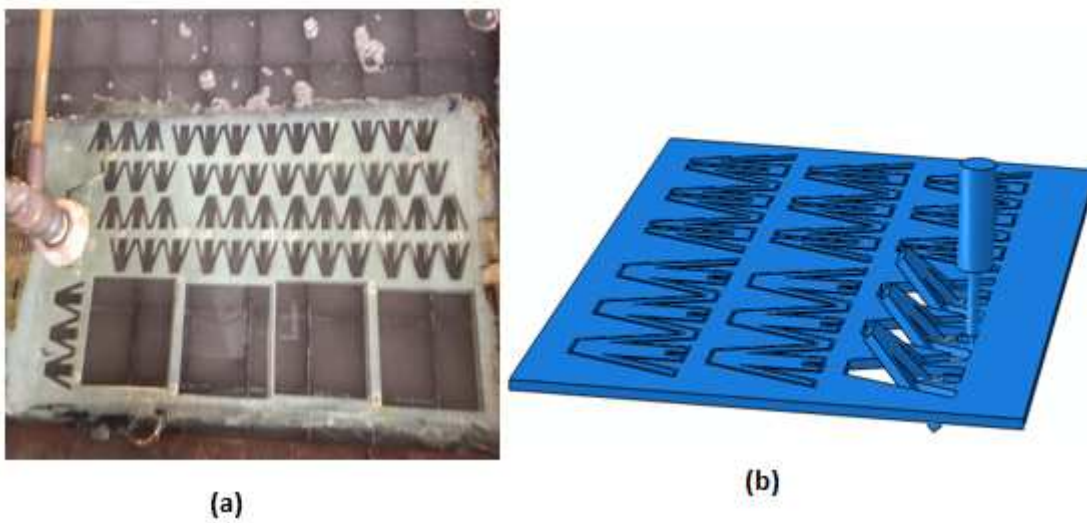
Cutting laminates by waterjet machine a) Real view b) Schematic view
